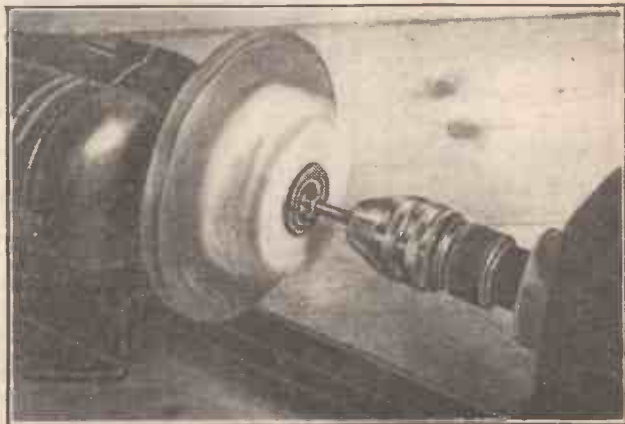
(Above).—The hardwood fixture mounted on the faceplate and the boring bar in a partially machined component. (Right) the boring bar machining a component.
